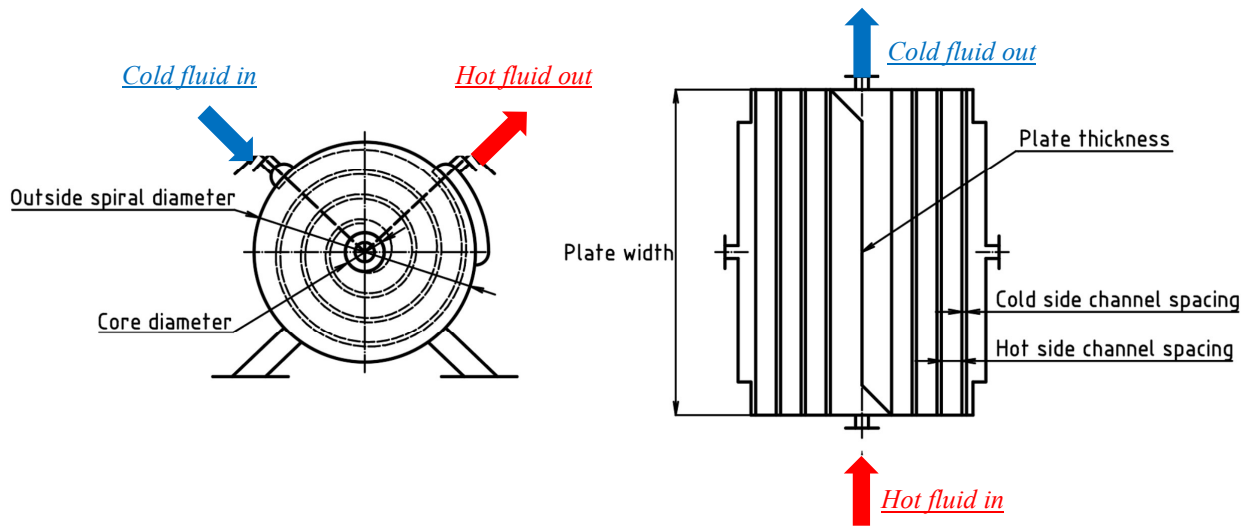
Schematic drawing of a spiral plate heat exchanger.
